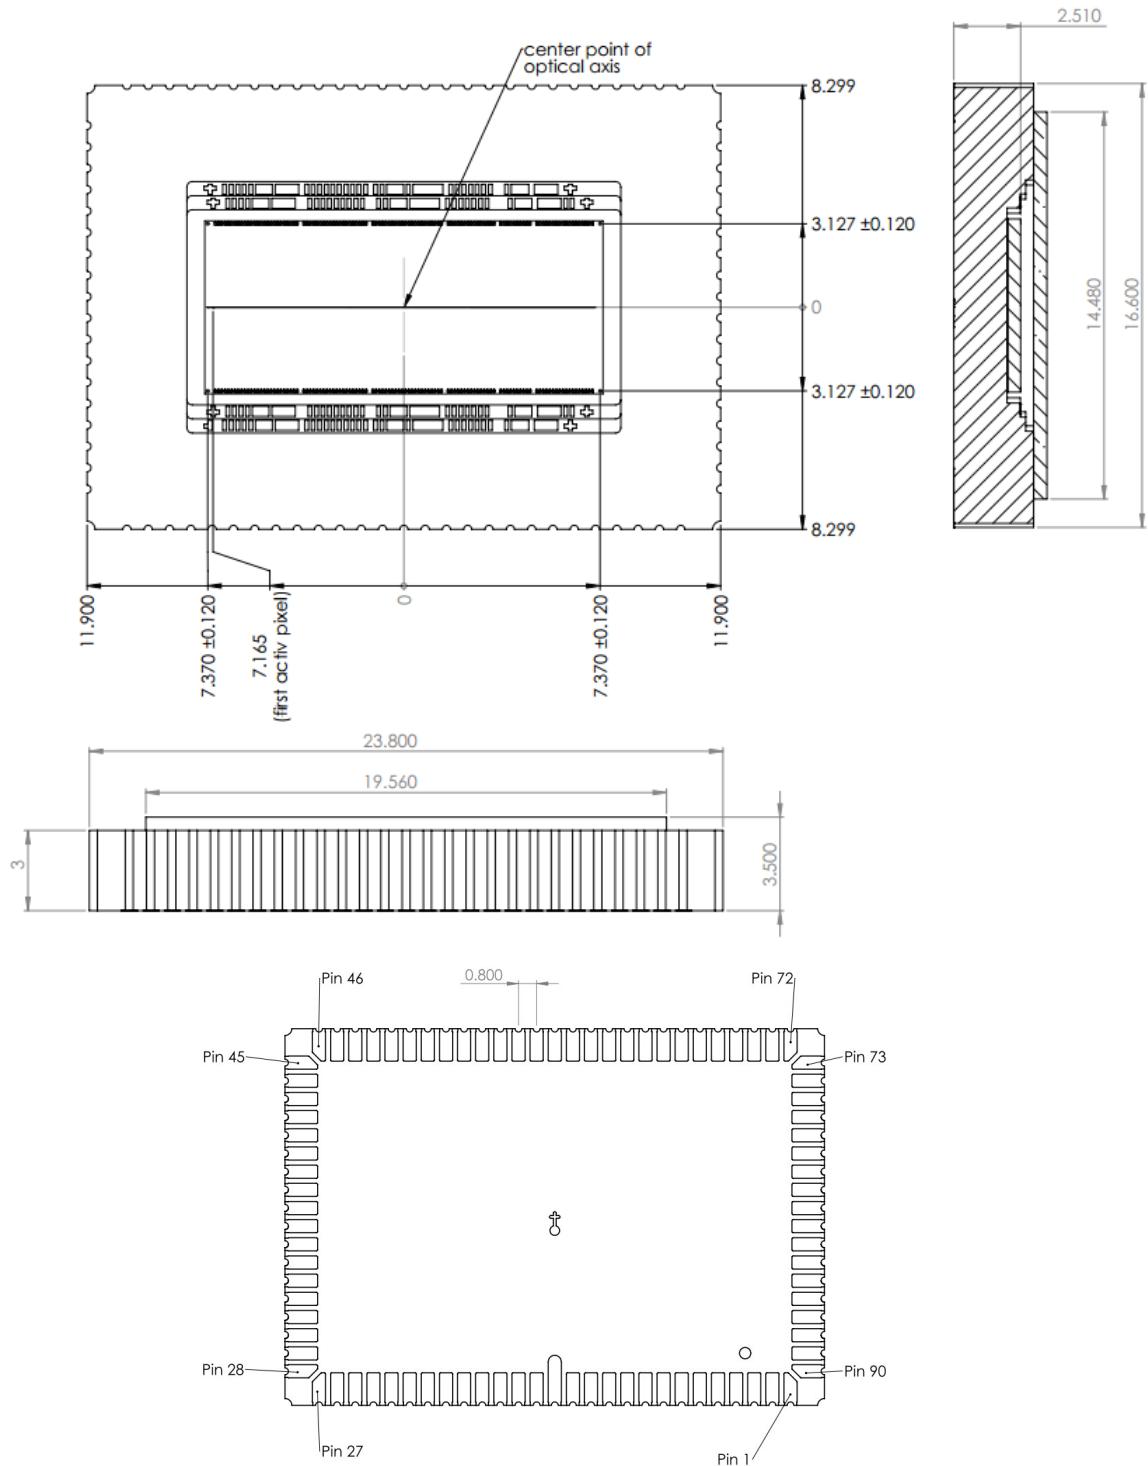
Four Views of LCC Package Drawings for DR2x2k-7 B&W and RGB, DR4k-3.5
